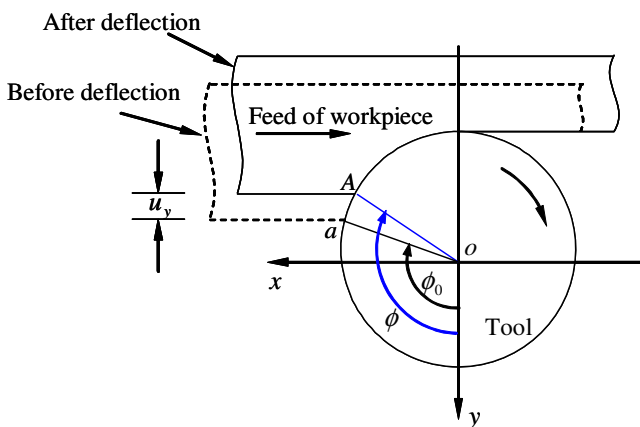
Part deflection in milling a low-rigidity part-view along the cutter axis
